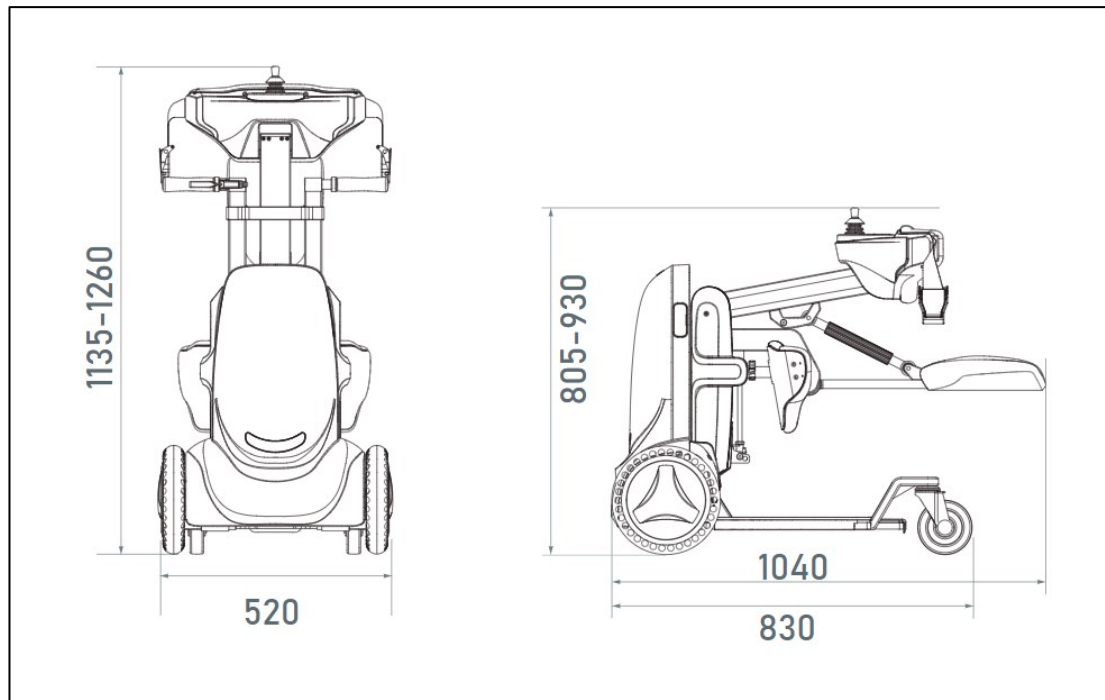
Dimensions in millimeters. (BangBang Robotics n.b.)
